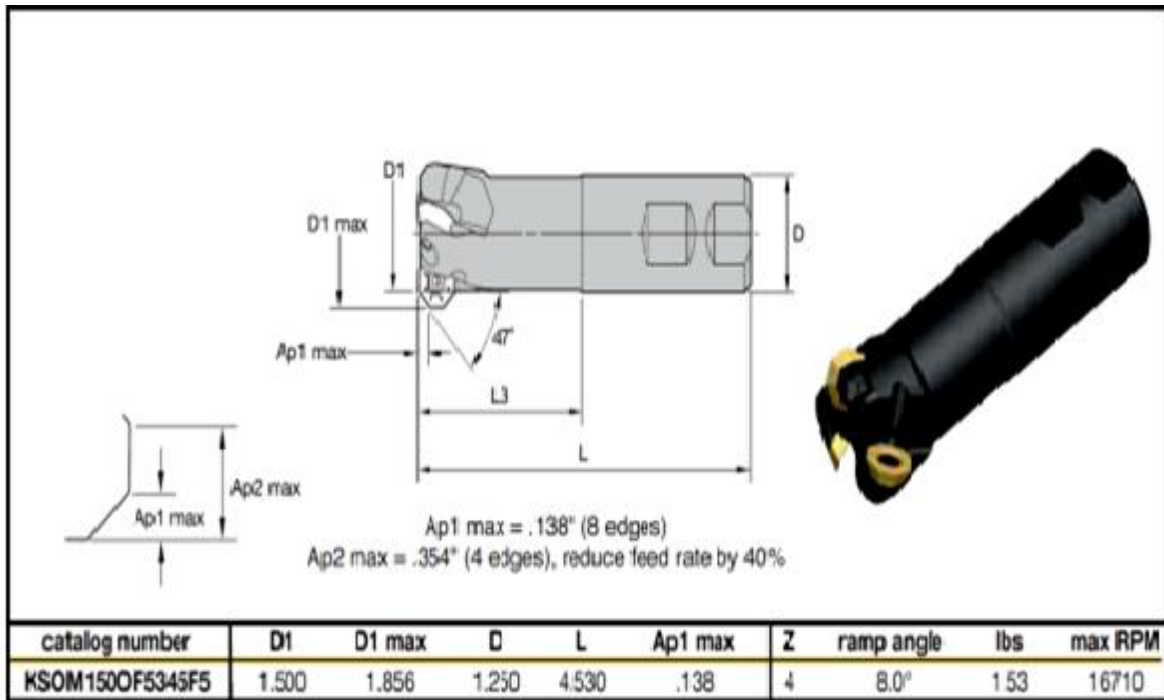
Milling tool and carbide insert X500 (Kennametal)
